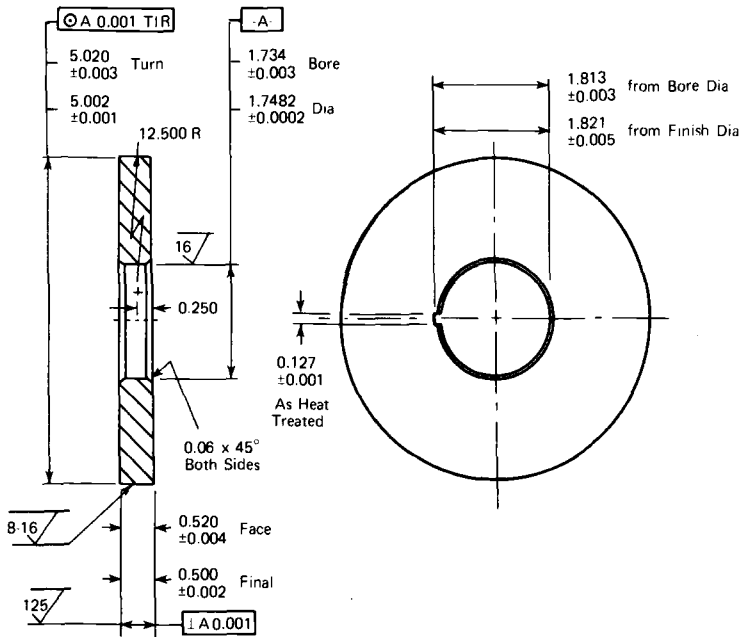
Load roller of the Caterpillar RCF machine. The dimensions are in inches; 1 in. = 25.4 mm.
